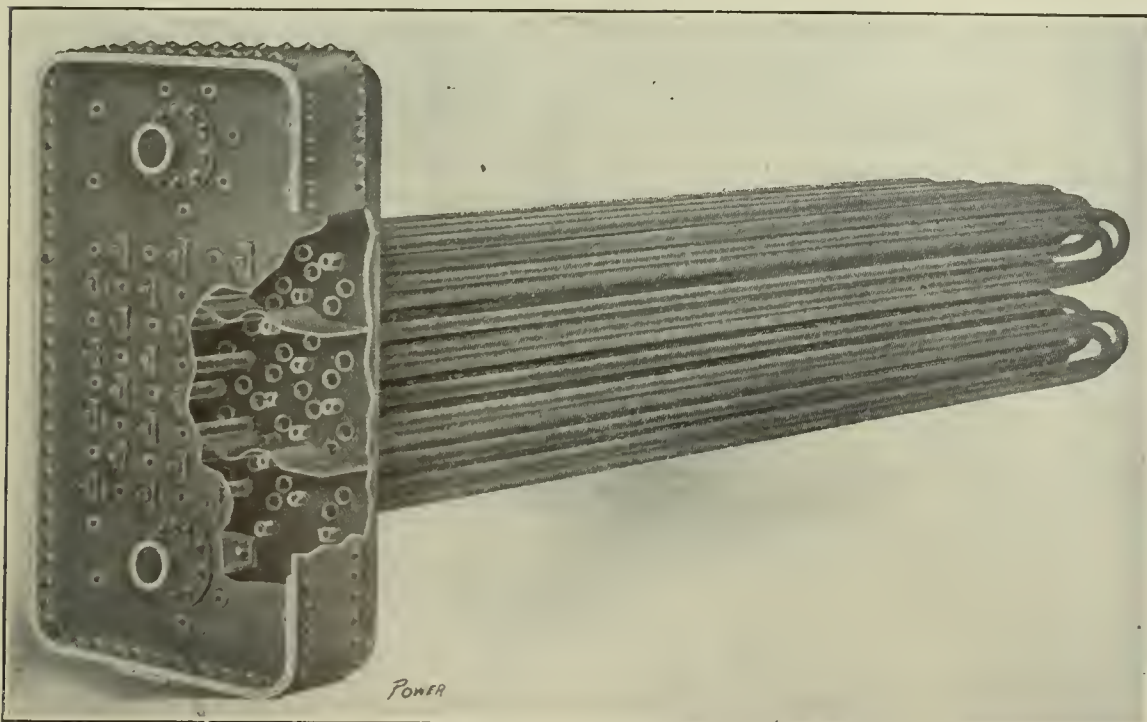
DETAILS OF TUBE AND HEADER CONSTRUCTION IN HEINE SUPERHEATER
